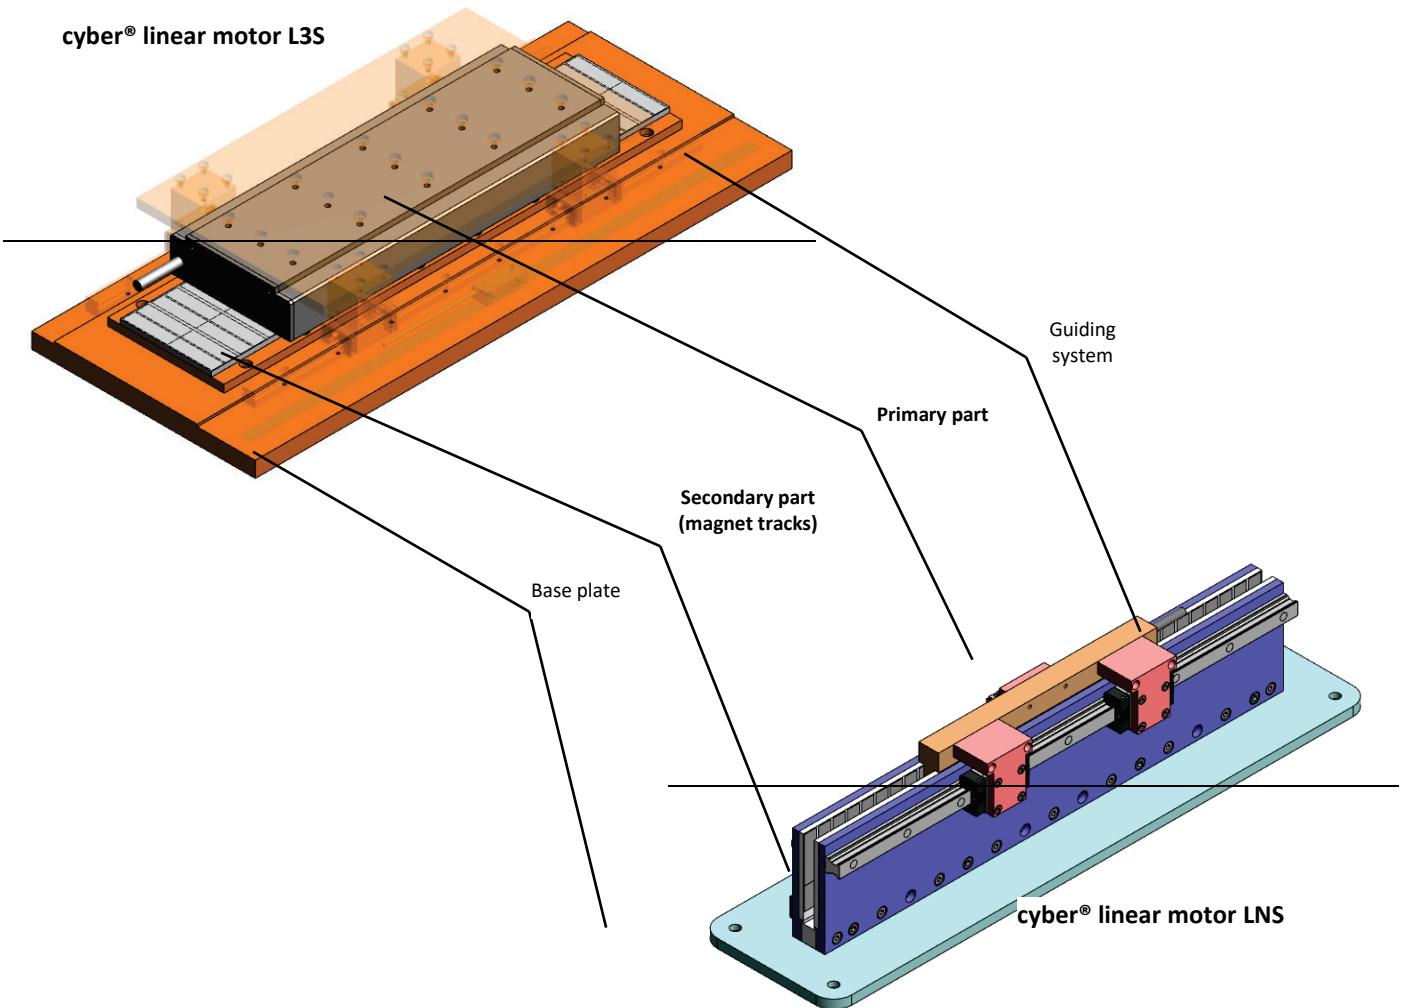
Basic parts of cyber® linear motors L3S and LNS
